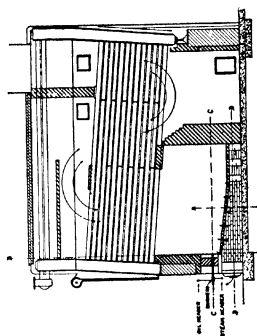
,450-sq. ft. boiler at Seal Beach Station, Los Angeles, with the oil-firing front under the downtake header. Special circulating tubes run from the top of the uptake header into the boiler drum to preclude steam binding. The burners are of a special combination type for the burning of either oil or gas. For access to the furnace the oil-burner section can be swung back on hinges. Air heaters are placed in the uptake, with vertical flue-gas tubes, while the air is carried in three passes at right angles to these tubes, heated to 300° F., passed to the forced-draft fan and thence down the side and rear walls and beneath the furnace hearth to the burner front. Oil is heated in three stages, the last heater employing steam at 350 lb. from a desuperheater, and fed to a loop system.
